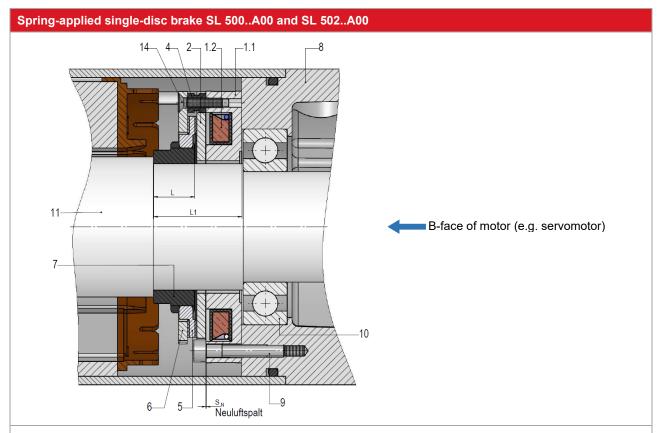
/1: Flange side mounting of spring-applied single-disc brake SL 500..A00 (example) to the motor (e.g. servomotor); contact of hub (7) with stop shoulder of machine shaft (e.g. motor shaft) (11); assembly of hub (7) and machine shaft (e.g. motor shaft) (11) by interference fit (see Section 4.1.2)
